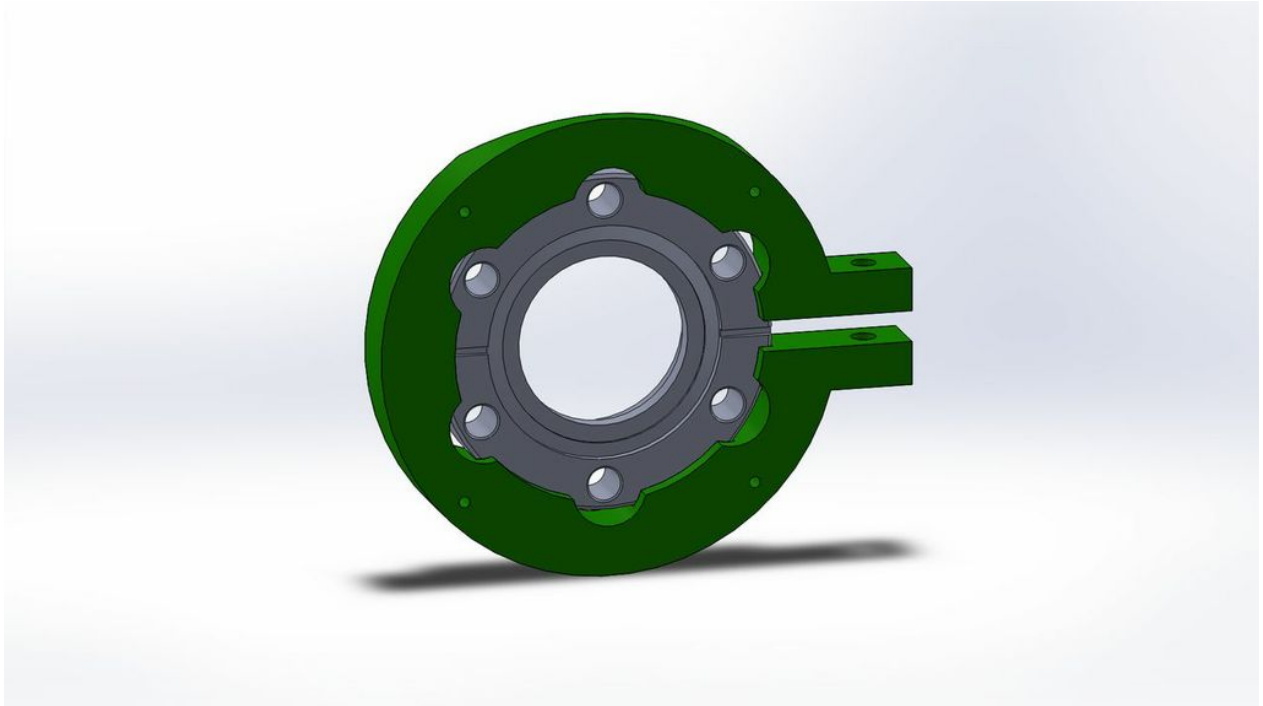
This is a three dimensional representation of the clamp designed to link the cage mounted optics to the CF 275 flange attached to the cube. The clamp rests on the front face of the CF 275 flange with six holes cut from the face of the clamp to allow room for bolts to attach the flange to the cube. The clamp can be tightened or loosened by applying pressure to the two tabs on the right. In order to avoid collisions with clamps on the neighboring faces of the cube, the backside of the clamp is cut at 45° angles at the top and bottom. Four 4-40 holes are drilled into the front face of the clamp in order to attach a 60mm Thorlabs cage system.
